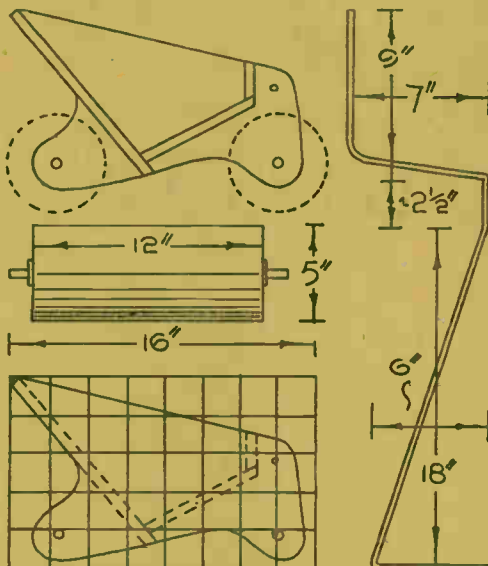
Side view with roller side shape in 2 in. squares, and half shape of shafting
